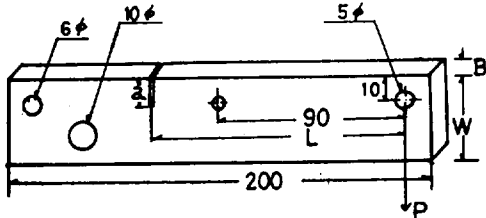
Geometry & dimensions of test specimen. P=load, a=crack, B=6mm, W=30mm, L=120mm.
